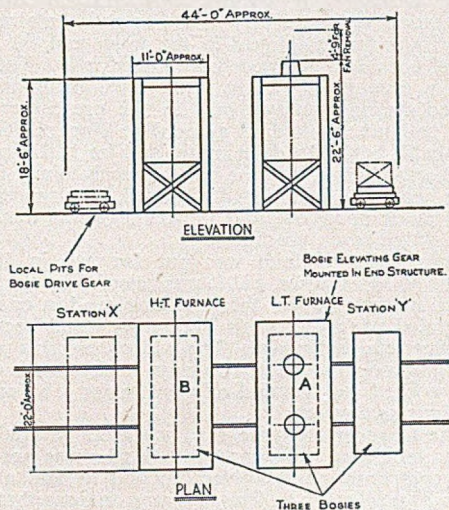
Diagrammatic Plan and Elevation of the Annealing Plant Arrangement at Gloucester Foundry.
